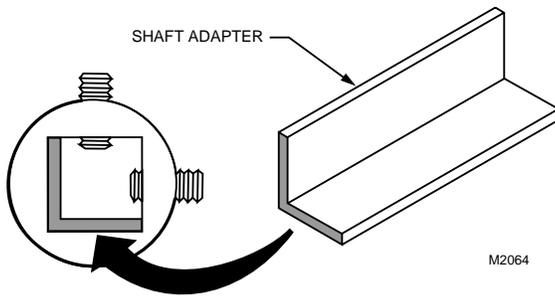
Using damper shaft adapter for 3/8 in. damper shafts.
